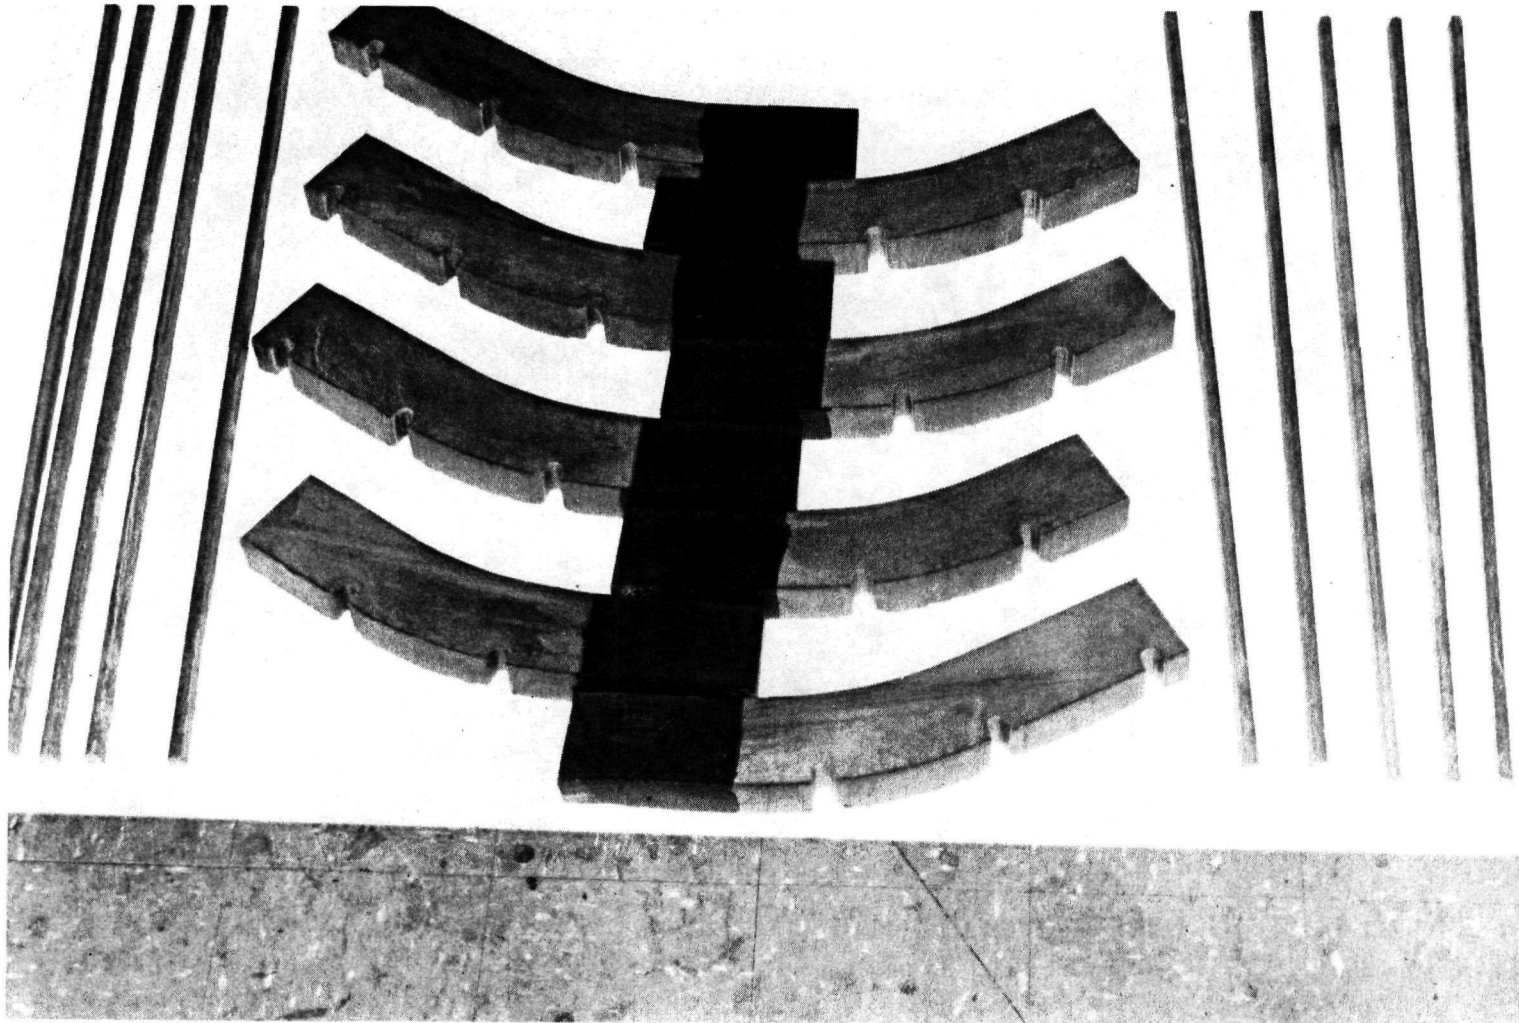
COMPLETED FOAM CORE DETAILS FOR FRAME AND STRINGER ELEMENTS, SHOWING DENSIFIED AREAS AT ATTACHMENT POINTS ON THE FRAME CORE ELEMENTS.
